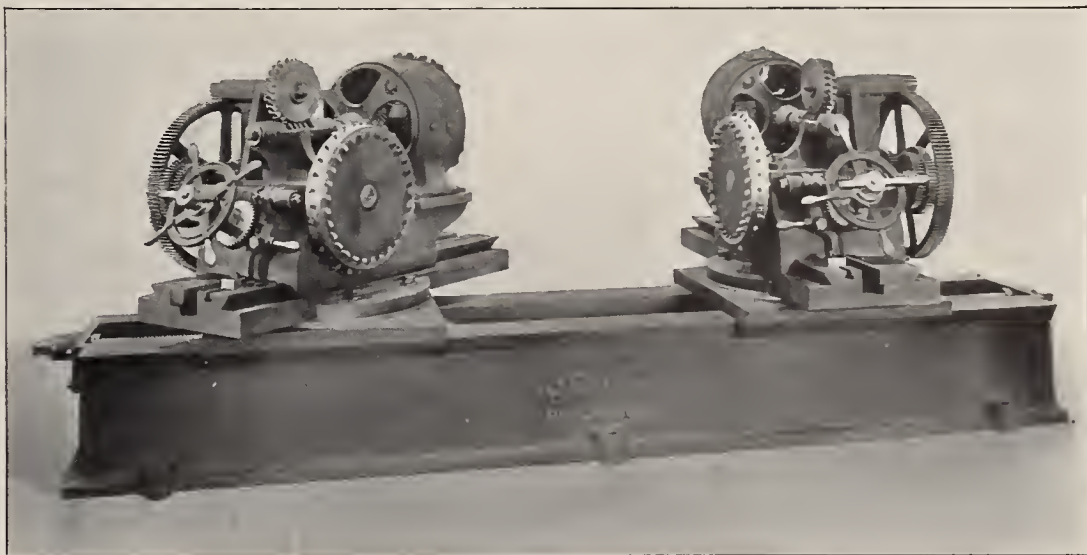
A DUPLEX ROTARY PLANING MACHINE WITH SWIVELLING HEADS. BUILT BY THE NEWTON MACHINE TOOL WORKS, PHILADELPHIA, PA., AND DRIVEN BY 5-H. P. MOTORS. SEE PAGE 241
